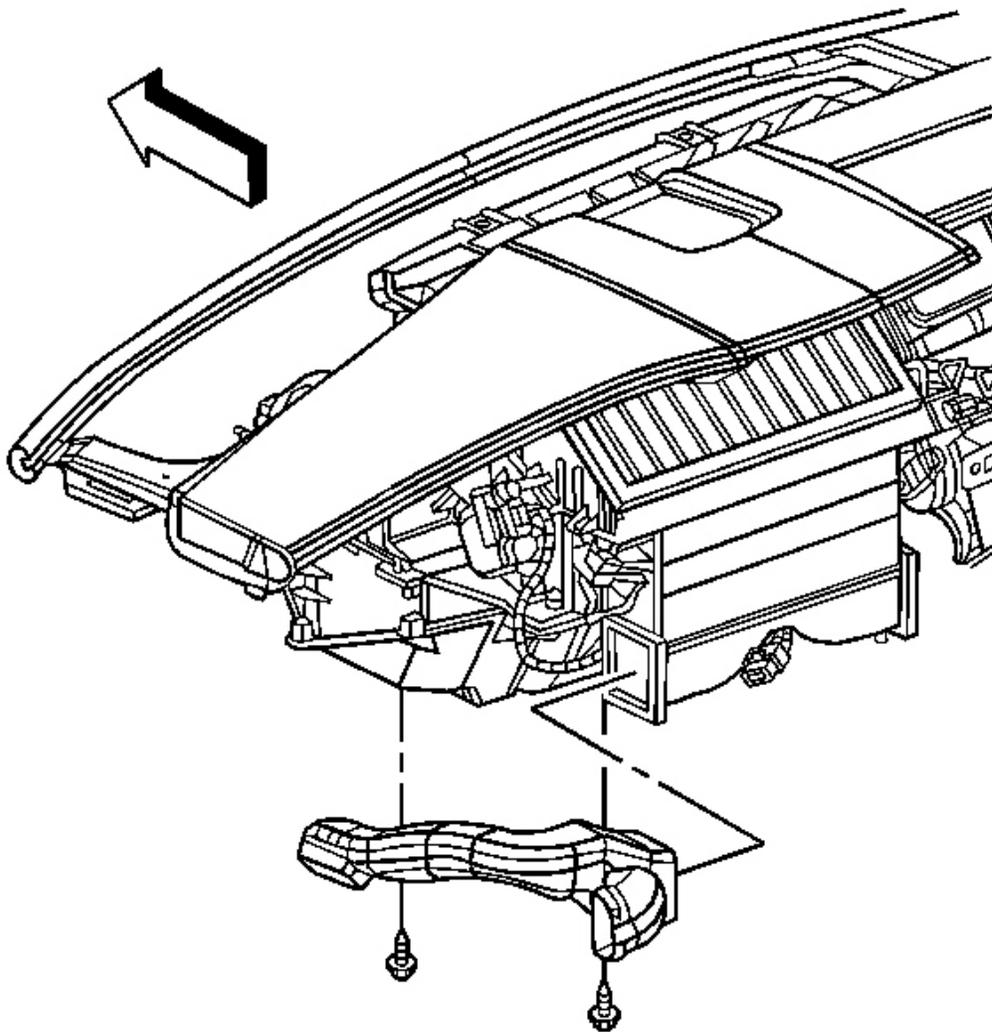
Floor Air Outlet Duct & Retaining Screws
